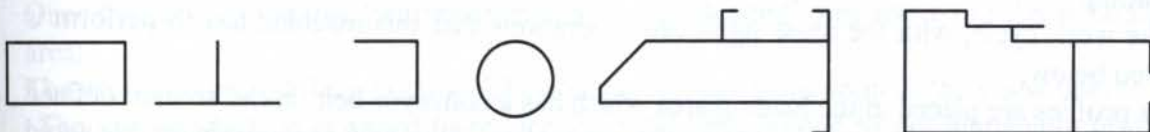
Examples of extruded aluminium profiles to be cut on the sawing machine.
